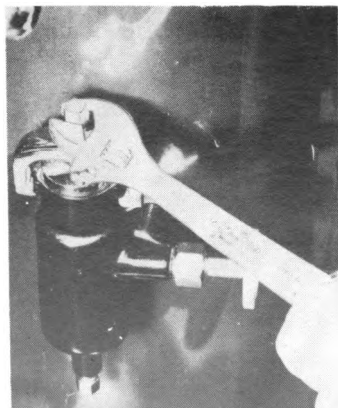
Loosening hexagon-head screw on air-filter cap.
